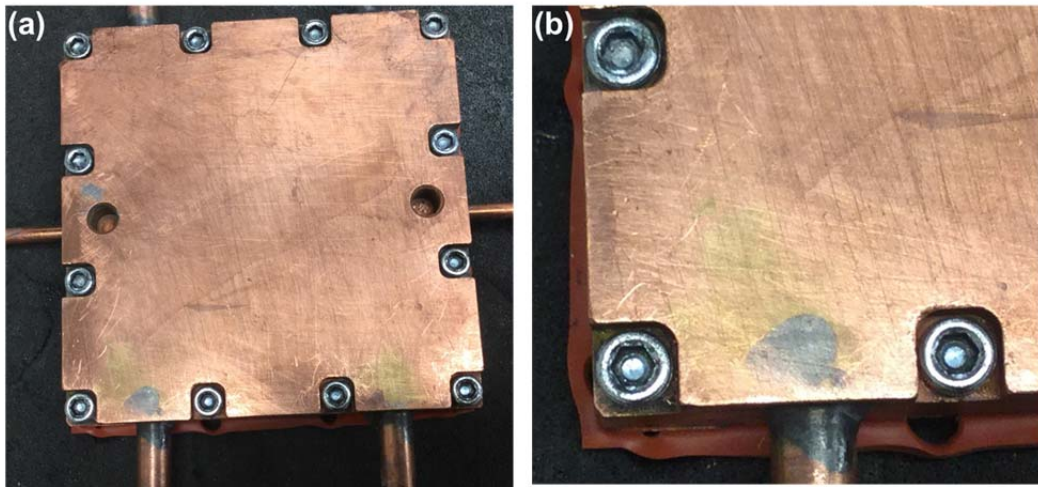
(a) Deformed 60A silicone gasket after chamber assembly; (b) enlarged lower left corner.
